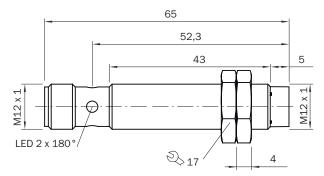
IME2S12-04N4DC0S02 dimensional drawing
